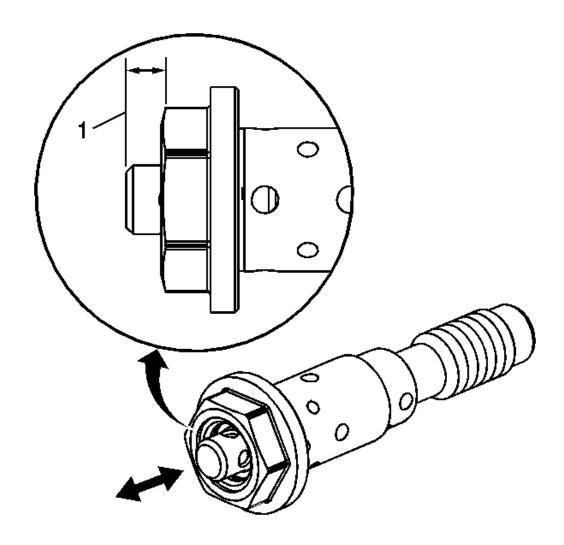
View Of Proper Valve Spool Position Courtesy of GENERAL MOTORS CORP.
